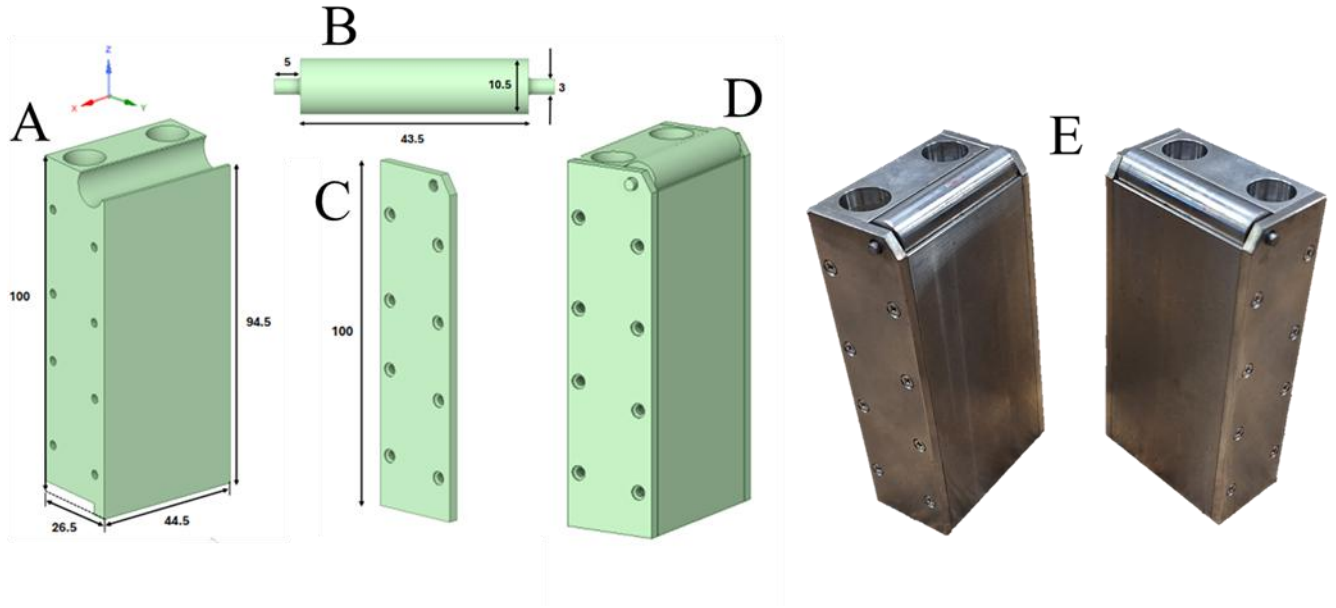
(a) Body with recess for roller insertion; (b) roller; (c) plate for locking the roller onto the body; (d) roller assembled to the body; (e) picture of the actual rollers.
